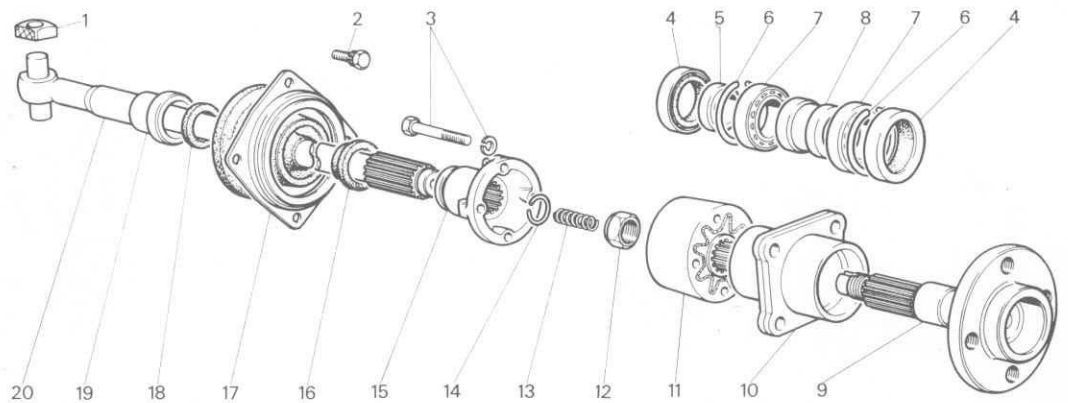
6 The components of the drive shaft (left) and the rear hub (right)
